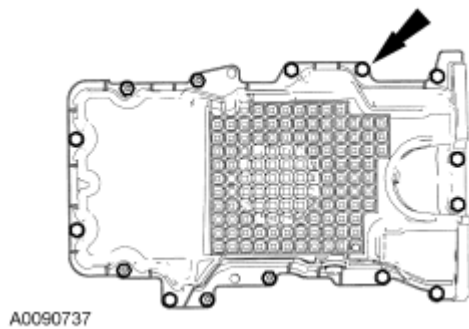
Locating Oil Pan Gasket Bolts & Stud Bolts
